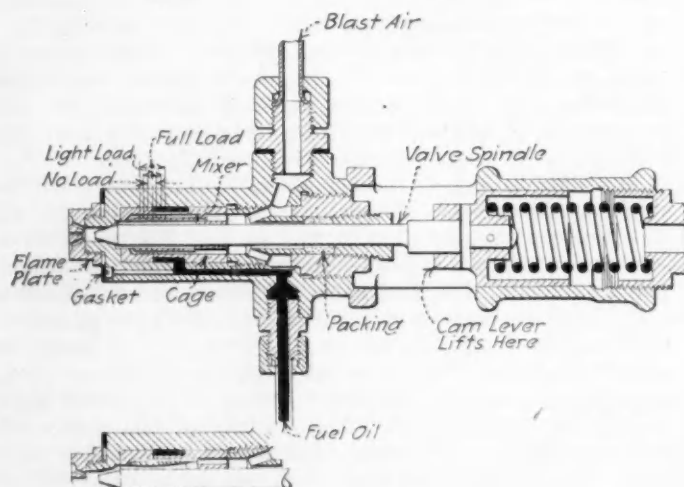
SECTIONAL VIEW OF A DIESEL-ENGINE FUEL-INJECTION VALVE
